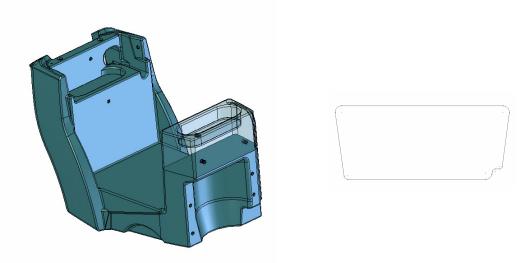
Three dimensional model of clean water tank showing modification of the front column (left) and sketch used to laser cut acrylic cap (right).
